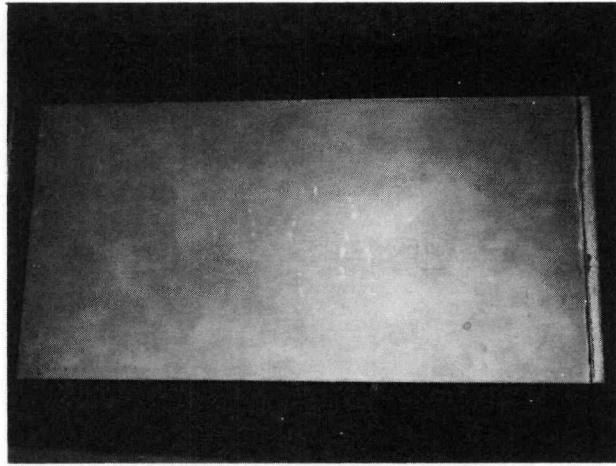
HAYNES-25/Be BRAZED HOT PLATE WITH CRACKS
